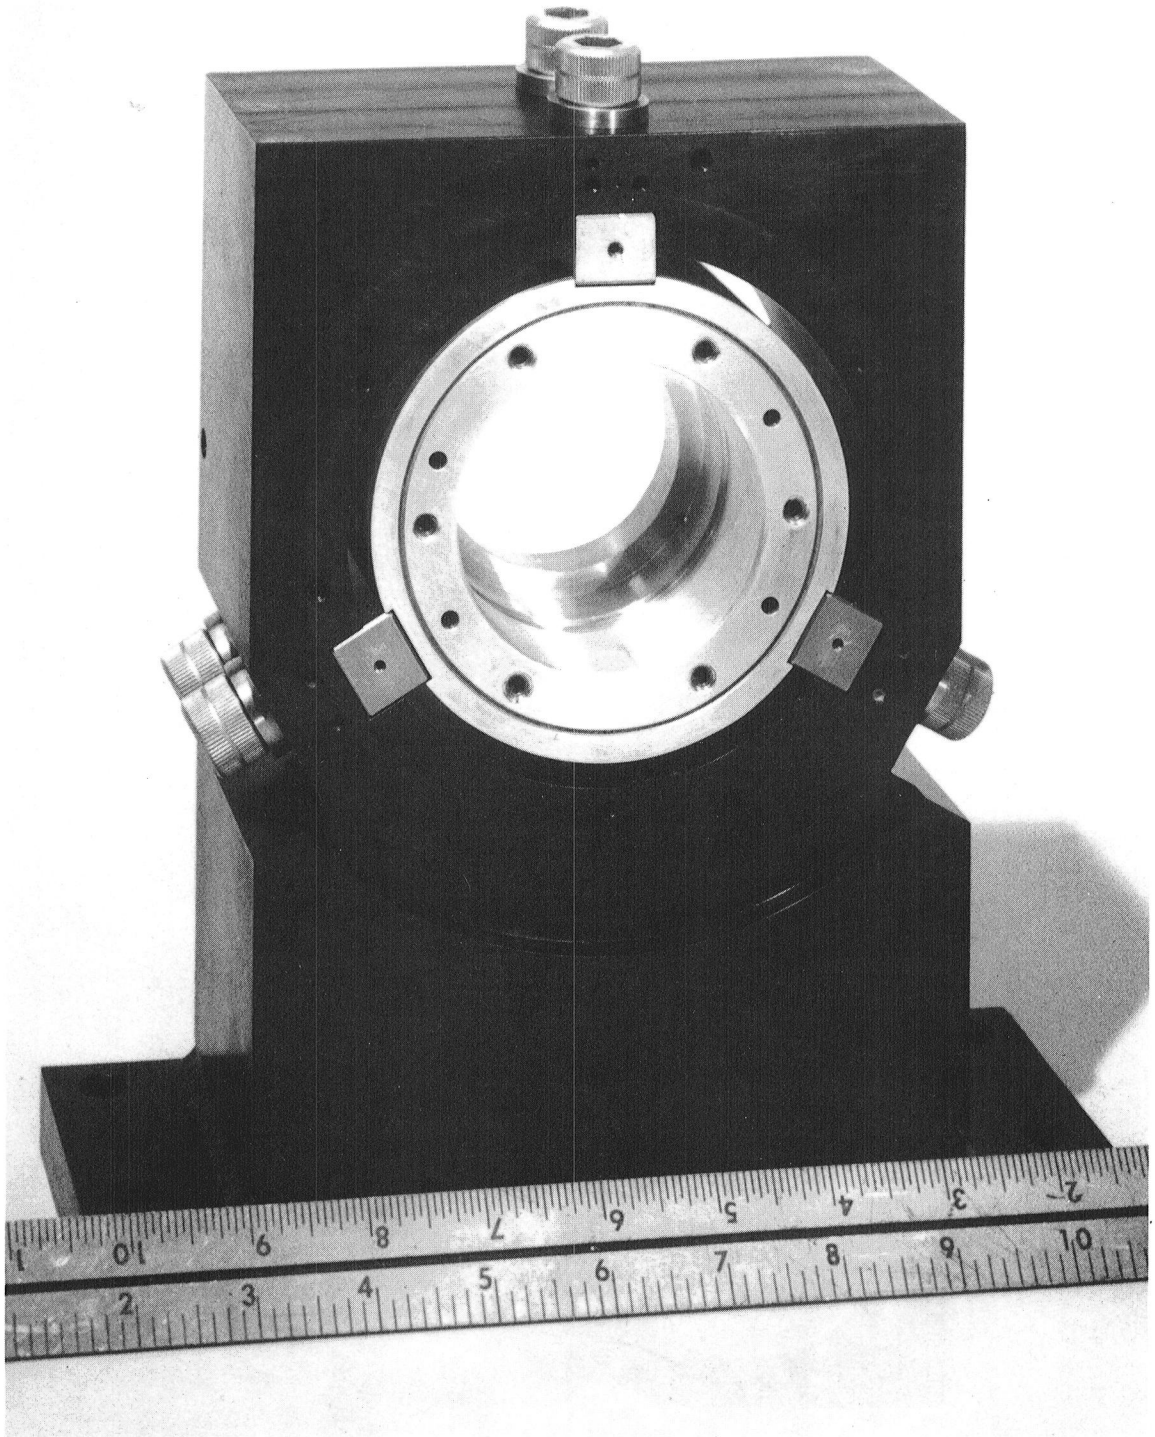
Partially Assembled Disc, Bearing Housing and Pedestal
